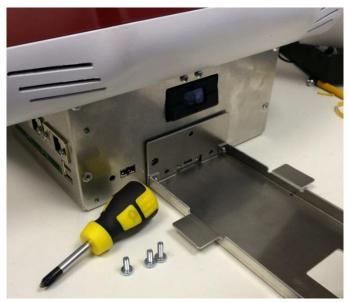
Assembling active shelf—aligning shelf with holes on Kiosk V5
